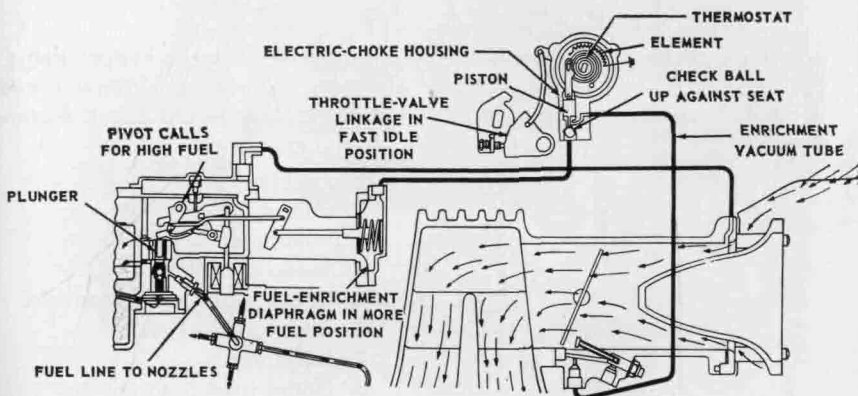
Choke system for cold starting. (Chevrolet Motor Division of General Motors Corporation)
